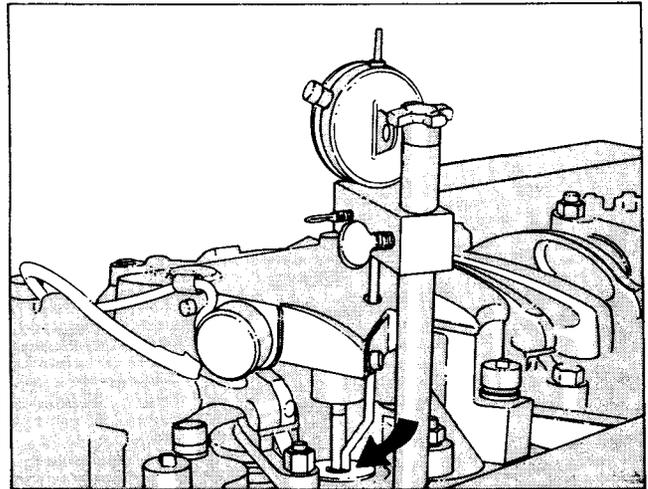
, (OM1061L). Dial indicator in place — extension in contact with plunger
